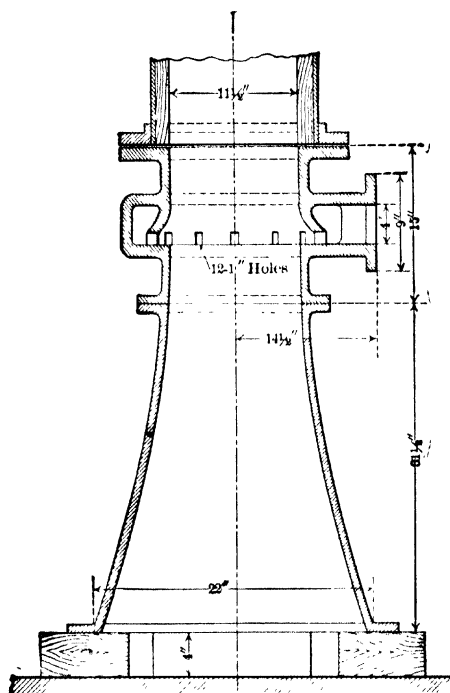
Foot-Piece for Air-Lift Pump, for Raising Mill Tailings and Slimes.
